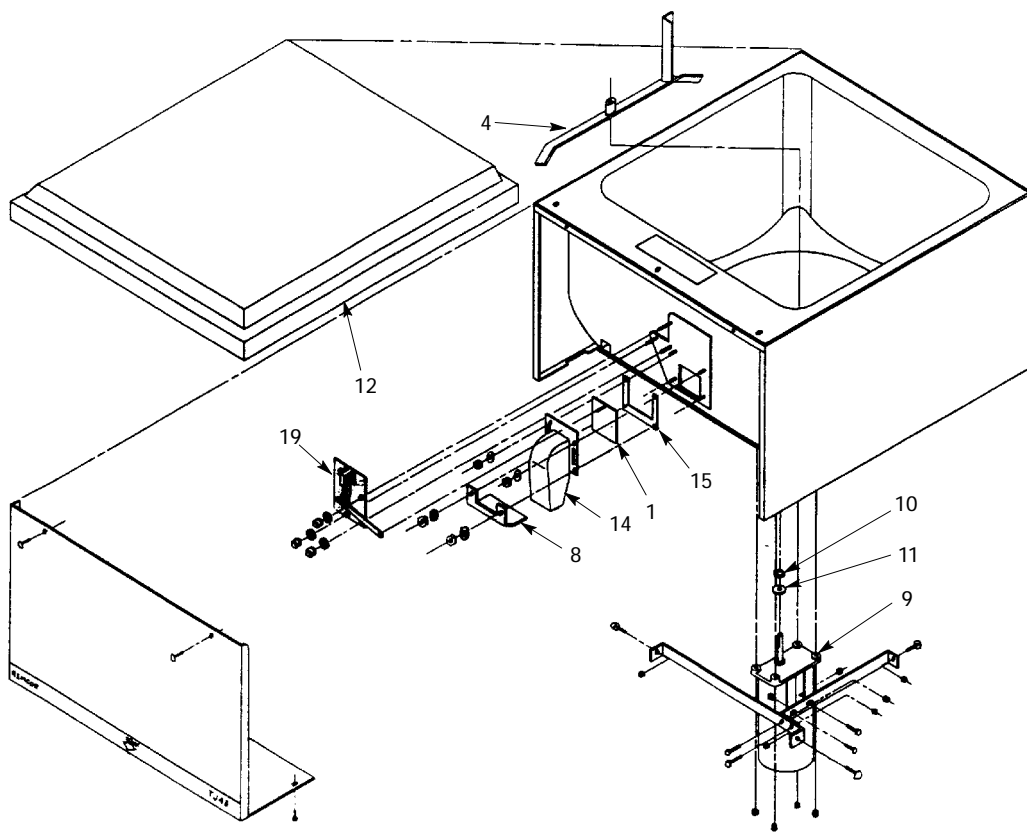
UPPER SECTION EXPLODED VIEW TJ45
